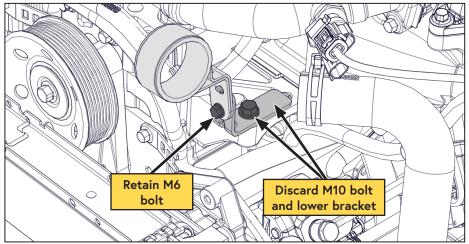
Radiator hose support bracket (Upper hose removed for clarity)
